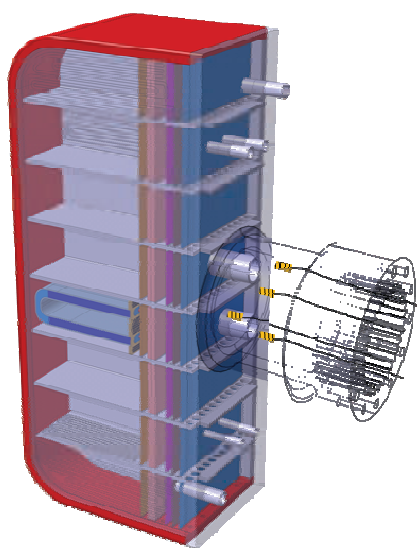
TBM box and cylindrical attachment system equipped with strain sensors.
